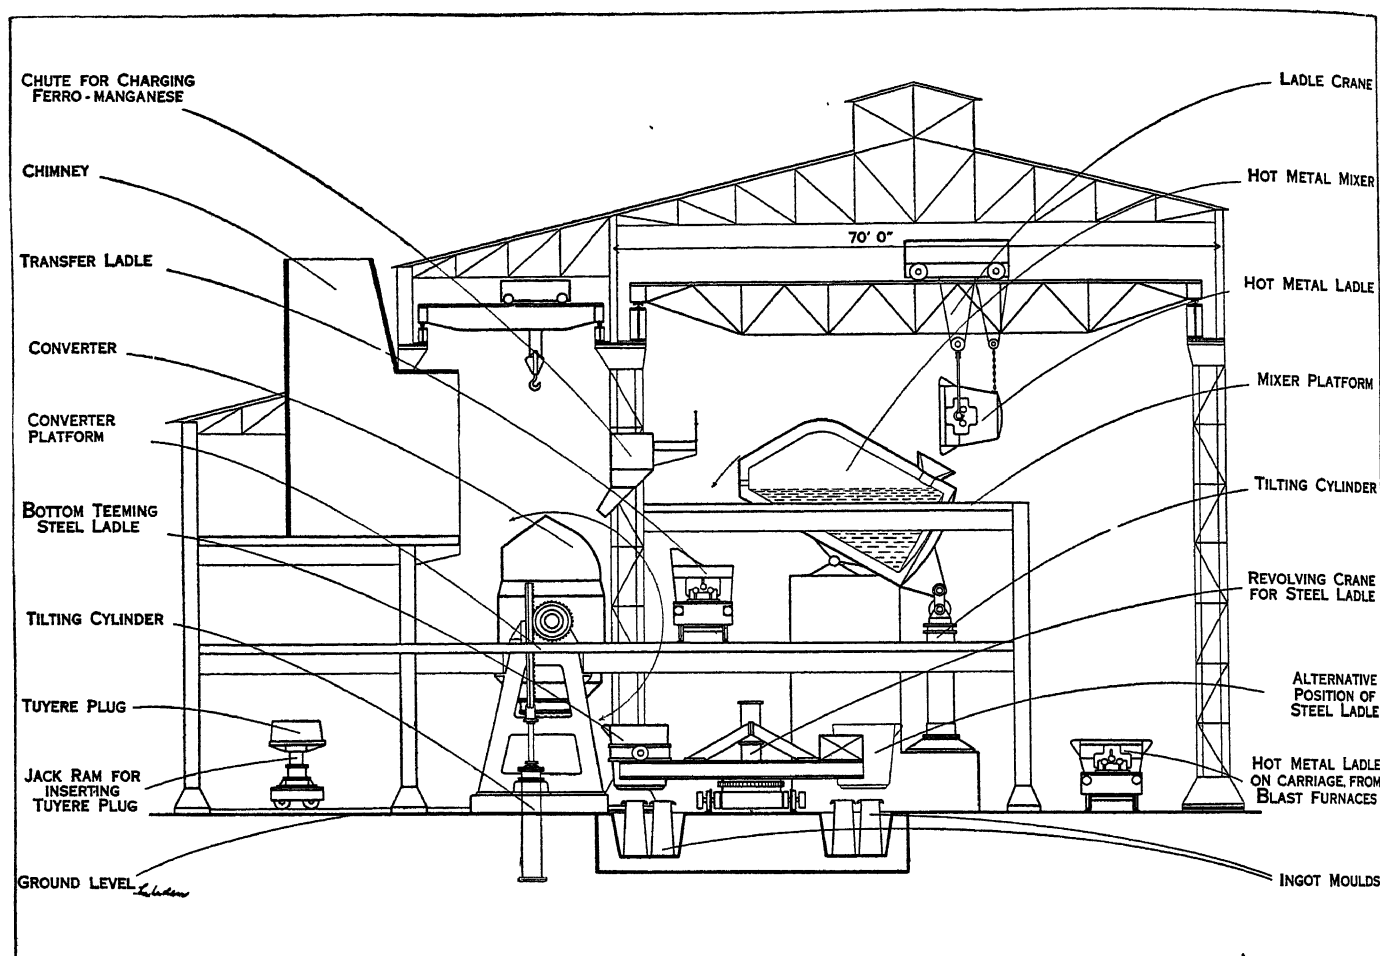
DIAGRAMMATICAL PLAN SHOWING ARRANGEMENT OF A BESSEMER STEEL PLANT
